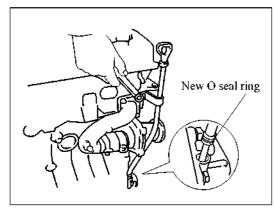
5 -95 Assemble the Oil Dipstick And Its Socket
